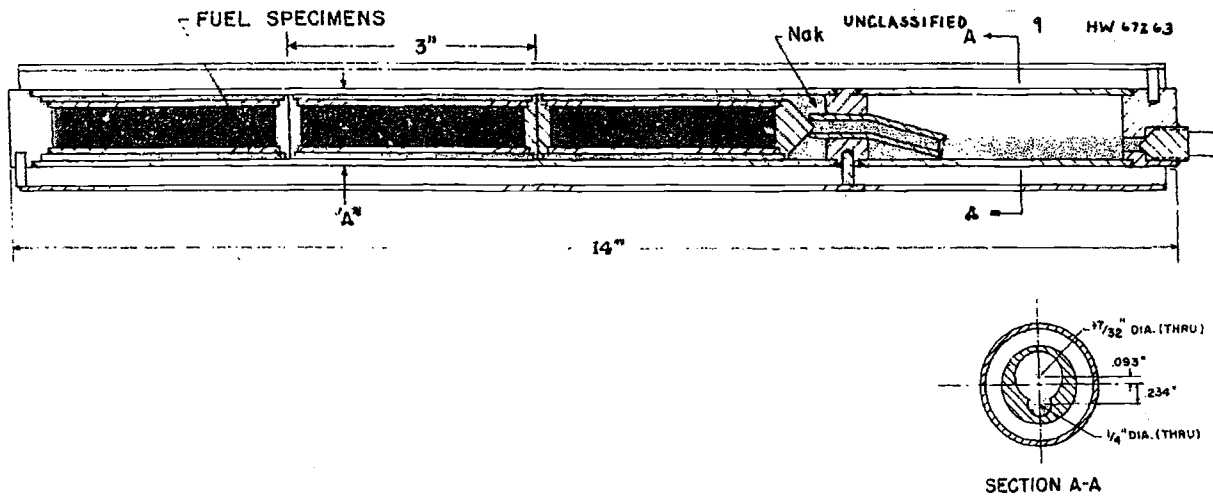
Typical Design for Test Specimen 118D3-SSNF-026.
